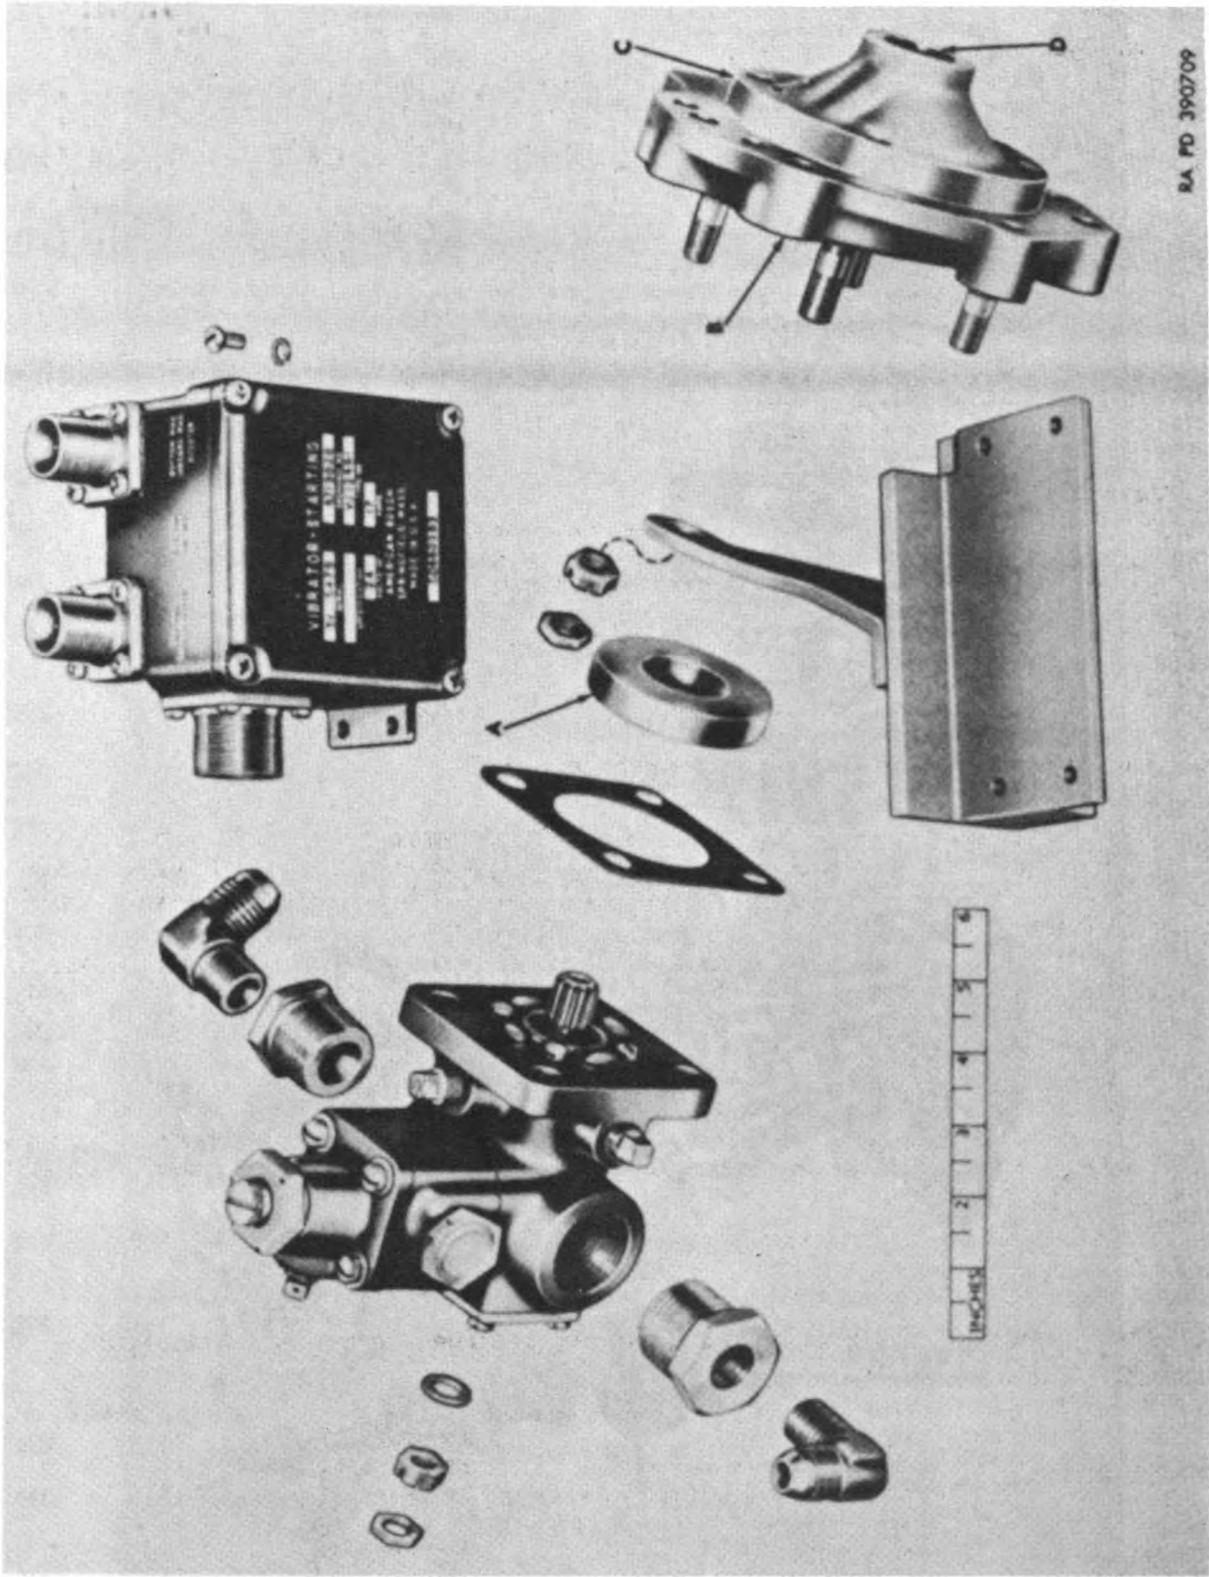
Repair and rebuild standard points of measurement for magnetic drive assembly and fuel injector pump
